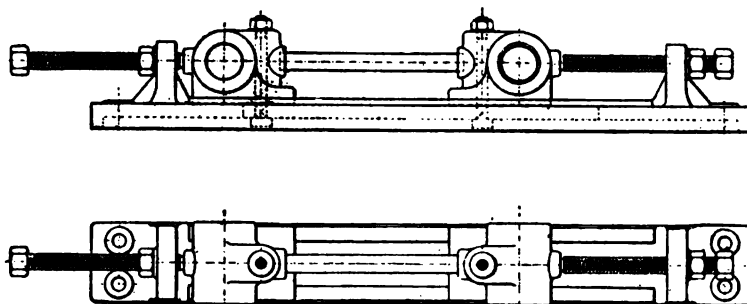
and 274 show a similar tightening gear, manipulated by screws and hand wheel. This gear is particularly suitable for long conveyors where a great deal of adjustment is required, as its position can be altered on a base plate.
